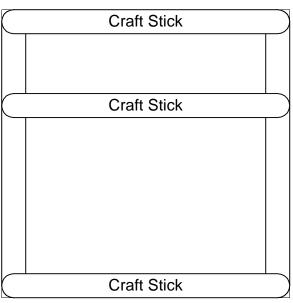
Glue 3 craft sticks across the first ones at the top, bottom, and about 3" from the bottom.
